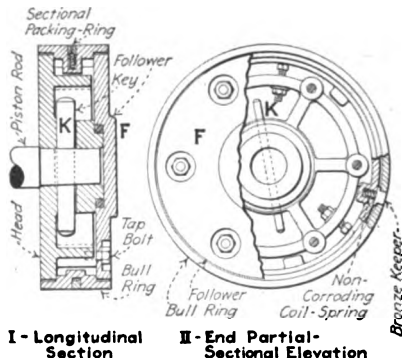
Piston construction used in the St. Louis Corliss engine. A taper cotter, K, is used in place of the usual piston-rod nut. (St. Louis Iron and Machine Works).
